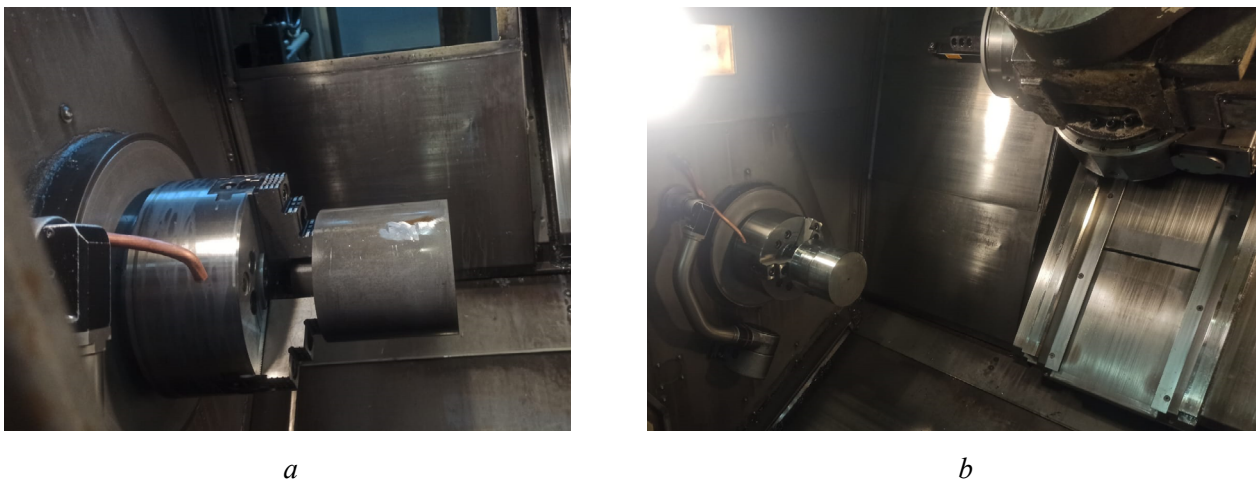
Views of the machine tool working area with a fixed workpiece (a) and the mandrel (b) with a ceramic insert
